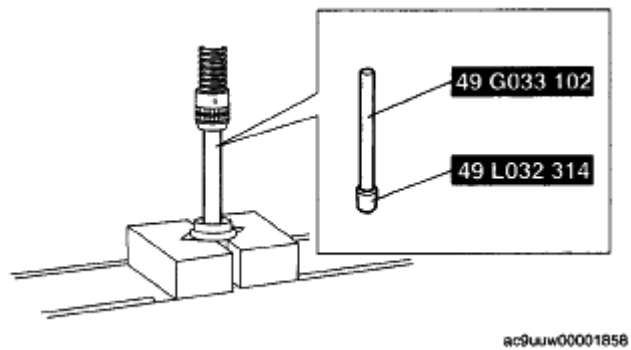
Removing Oil Seal From Holder Using SST & Press
